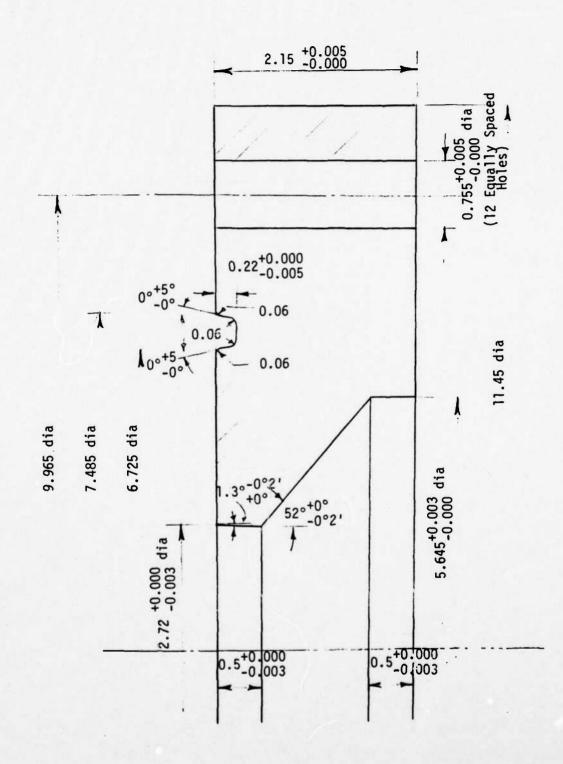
Detailed Working Drawing (Cross Section) of the Double Cone Expendable Section
